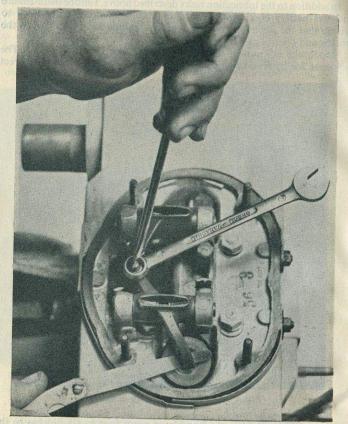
ADJUSTING VALVE CLEARANCES (TROJAN)
